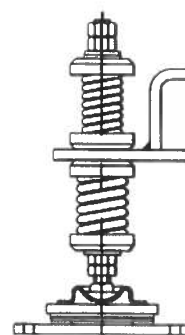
Baseplate mounting springs with slide bearing
